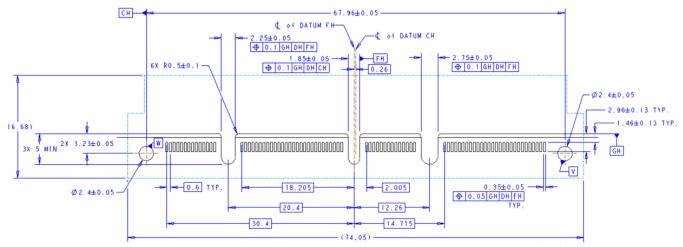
4C+ STRADDLE MOUNT CONNECTOR FOOTPRINT (MM)
